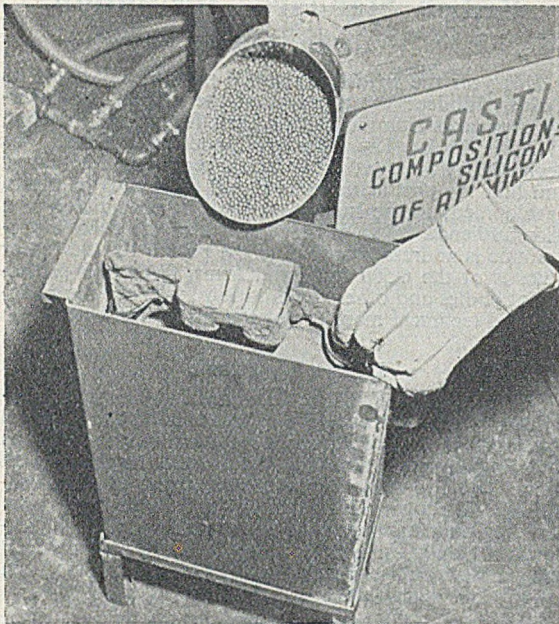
Assembled Mould in a Container is backed by Steel Shot.
